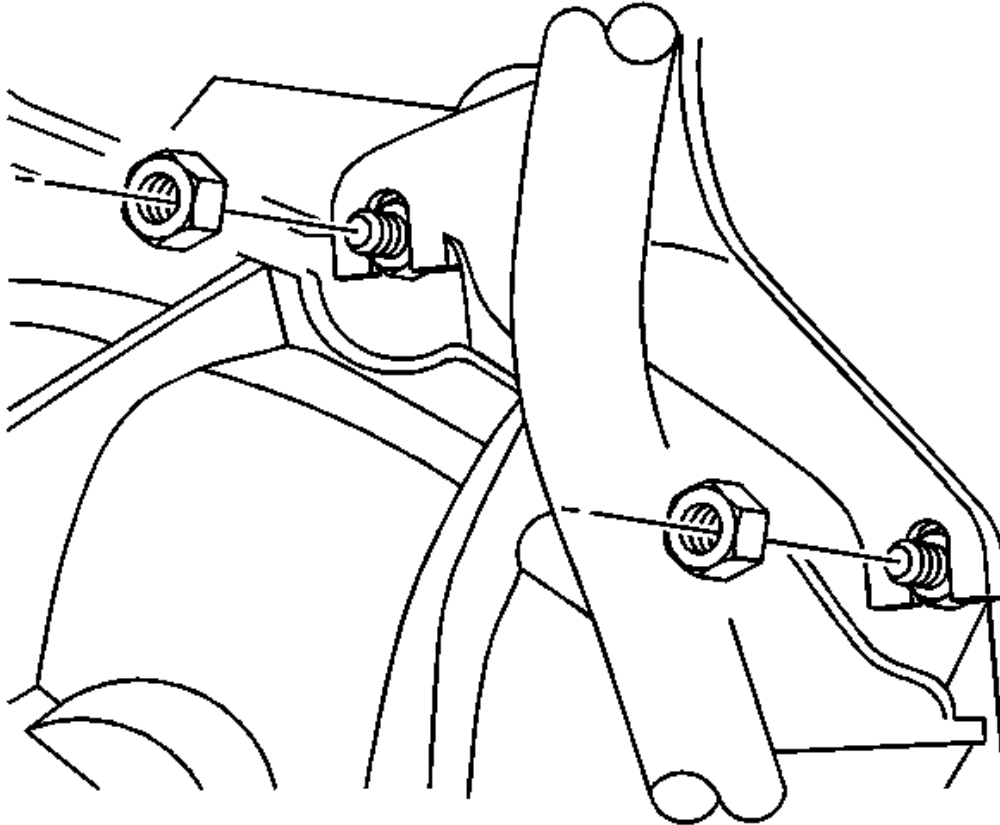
View Of Fill Tube To Bellhousing Nuts
